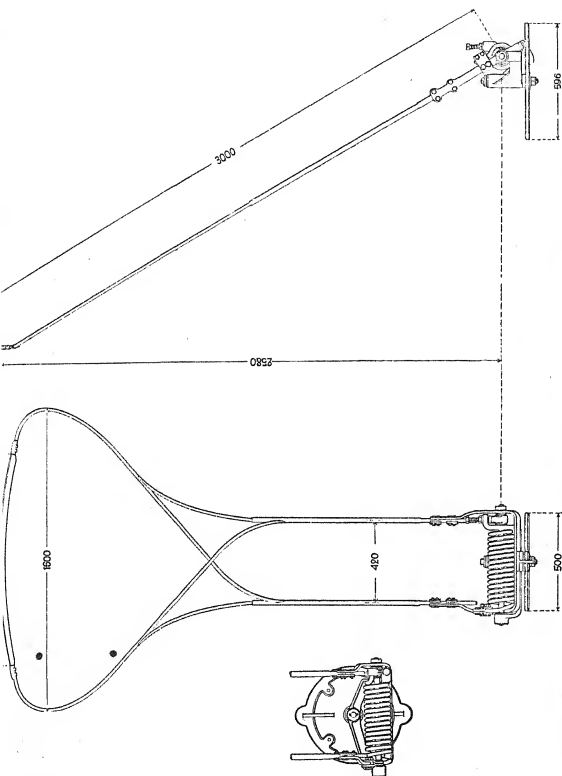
Siemens-Schuckert bow collector (dimensions in millimetres).
